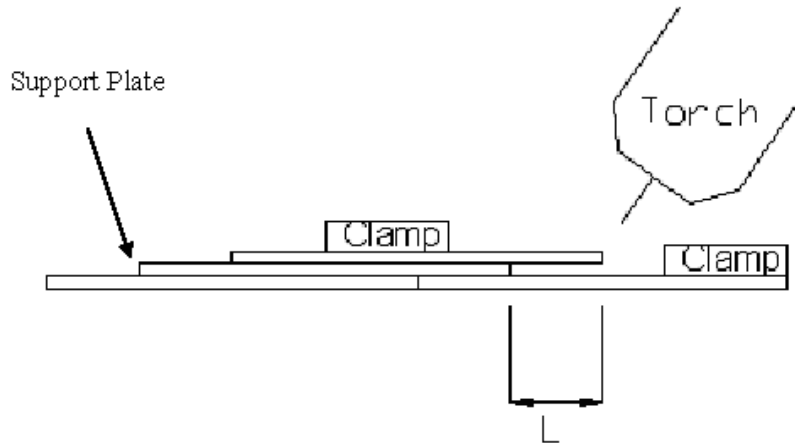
Side View of Joint Setup Showing 1T gap Introduced at the Weld Region
